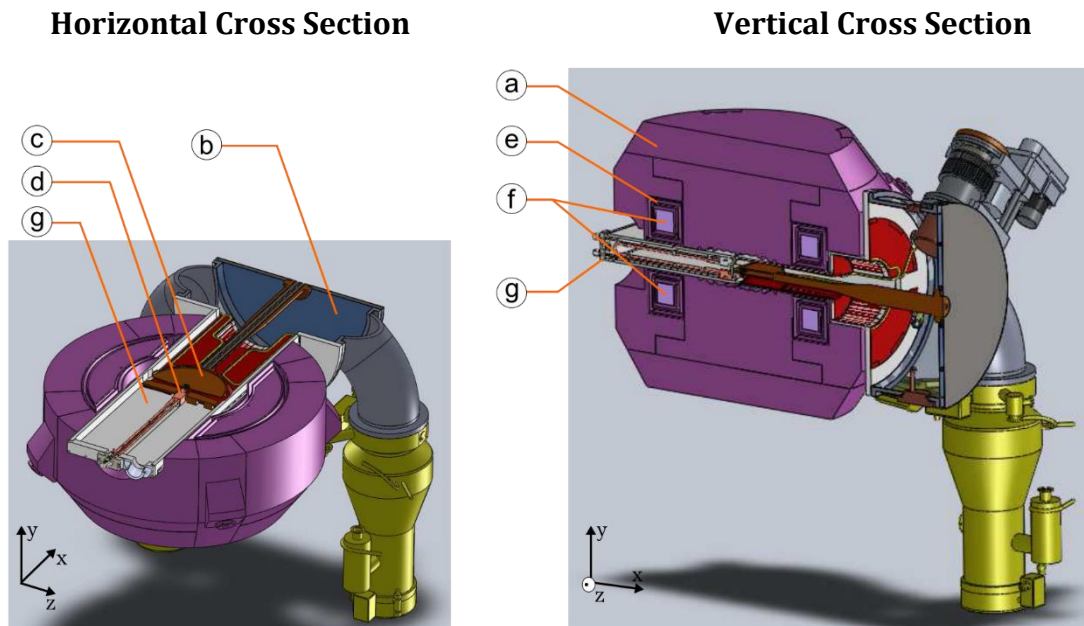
Cross-sectional views of the technical model of the cyclotron assembly. [53]
